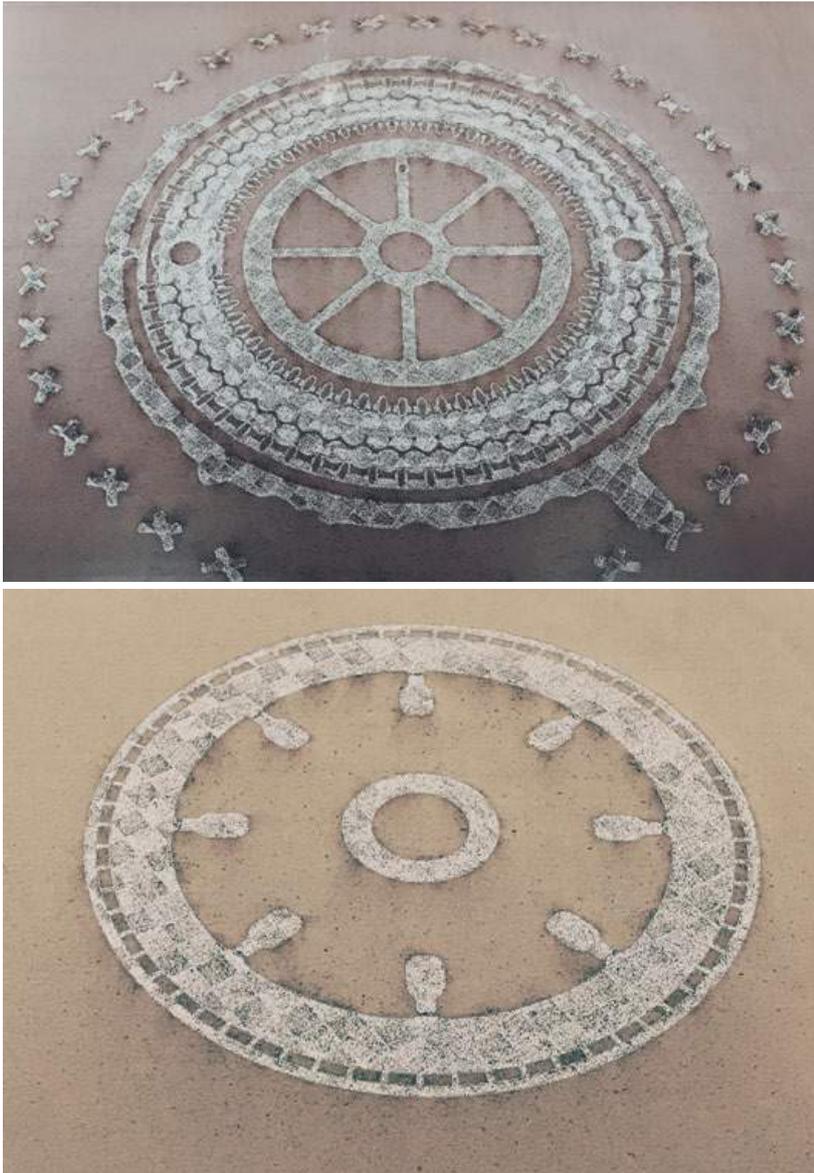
Build chamber views showing sections of the cooling channels employed in the aerospike engine (Courtesy Aenium Engineering)
